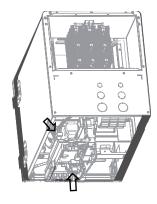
Connect Auxiliary Heater Connector to Board Assembly
